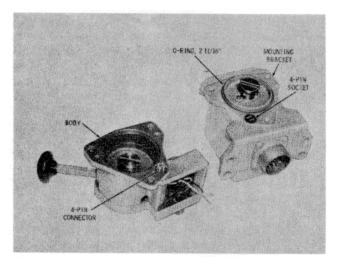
Shift Tower Body Section and Switch Section Separated
